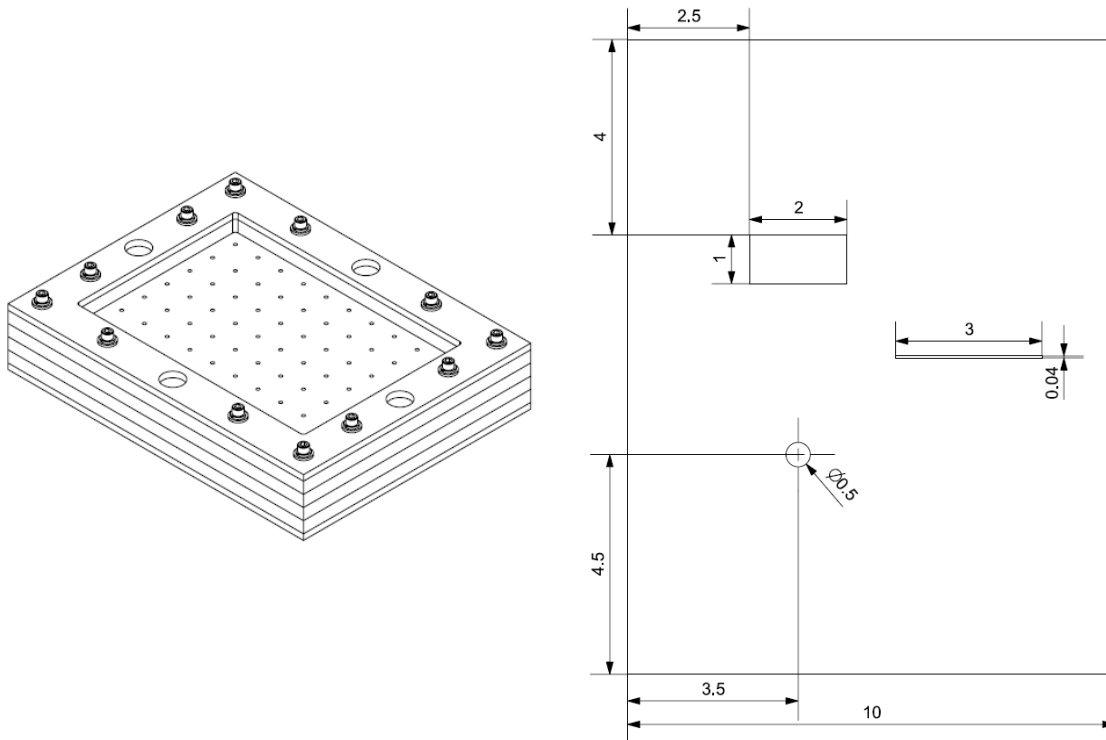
Mold assembly for the 7 in x 10 in x 0.5 in rectangular plate samples with intentional stress concentrations. The dimensioned drawing on right (note the dimensions are in inches) shows the location and size of the stress concentrations on the mold insert. The perimeter of the plate sample is represented by the brown dashed line.
